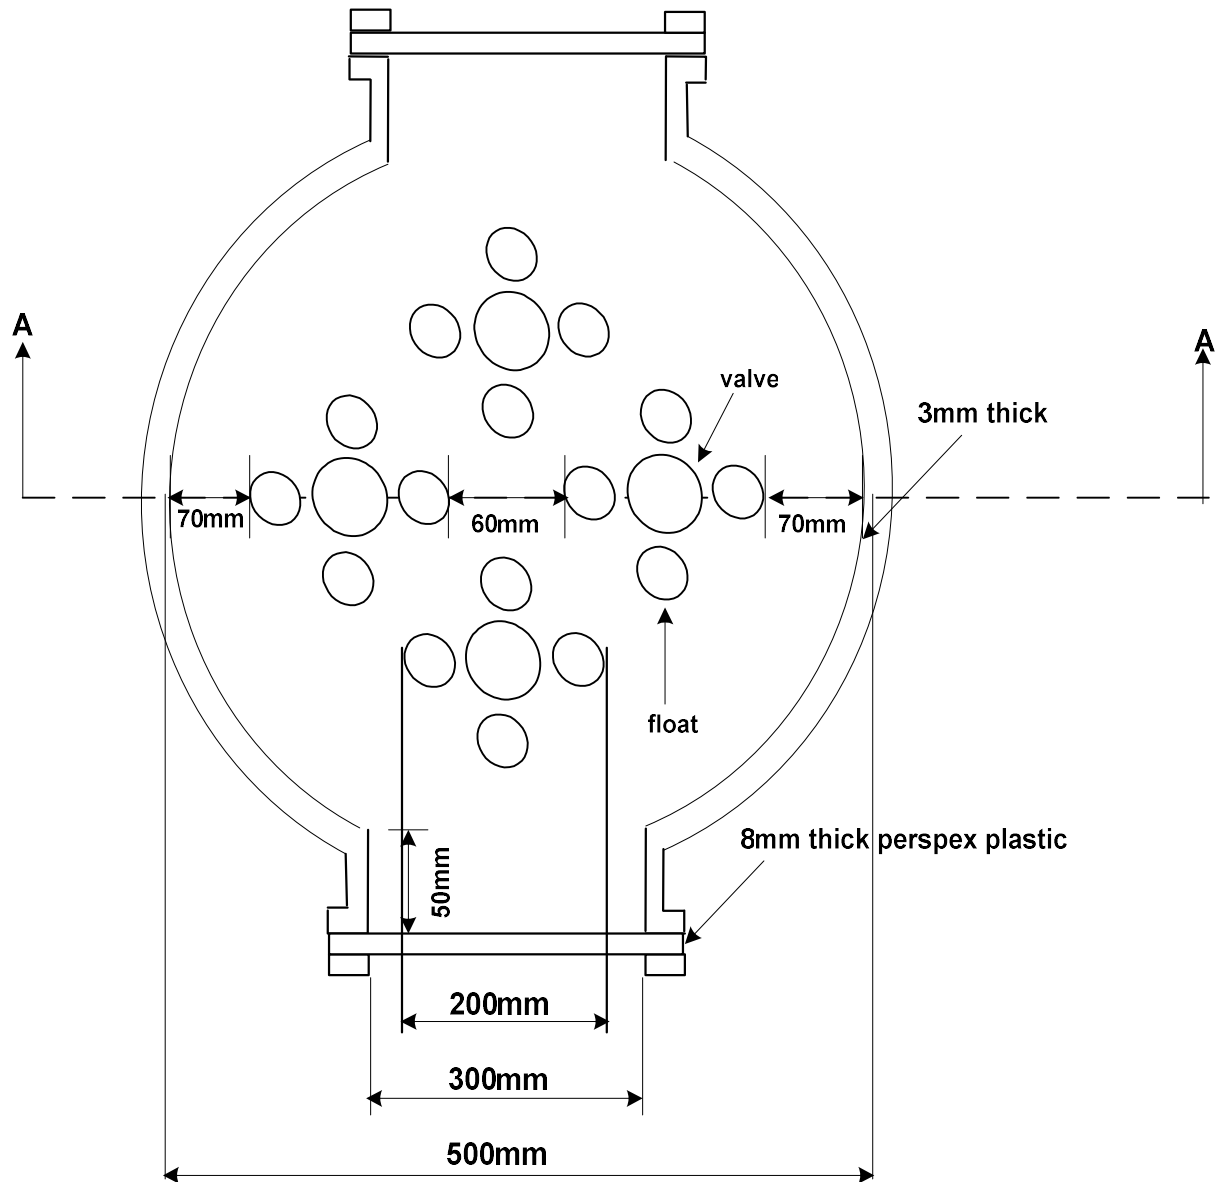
Top View of Horizontal Cut C-C above Plate 2 (See Figure 3.10)
